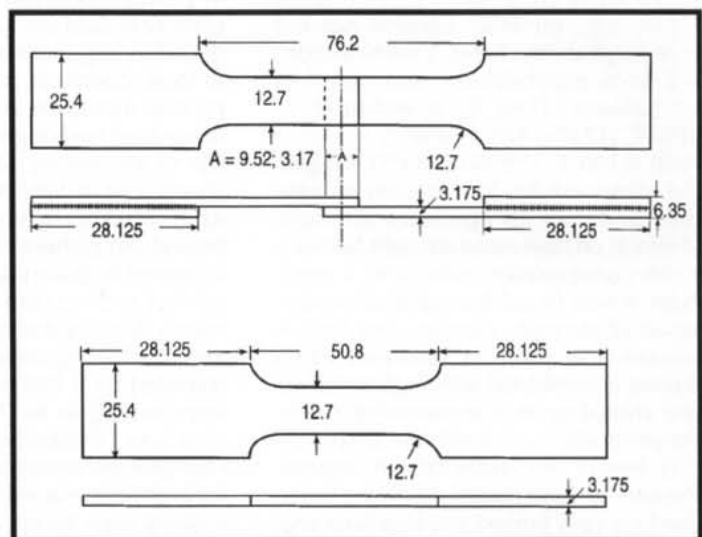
Brazed specimens and base metal for tensile and fatigue testing.
